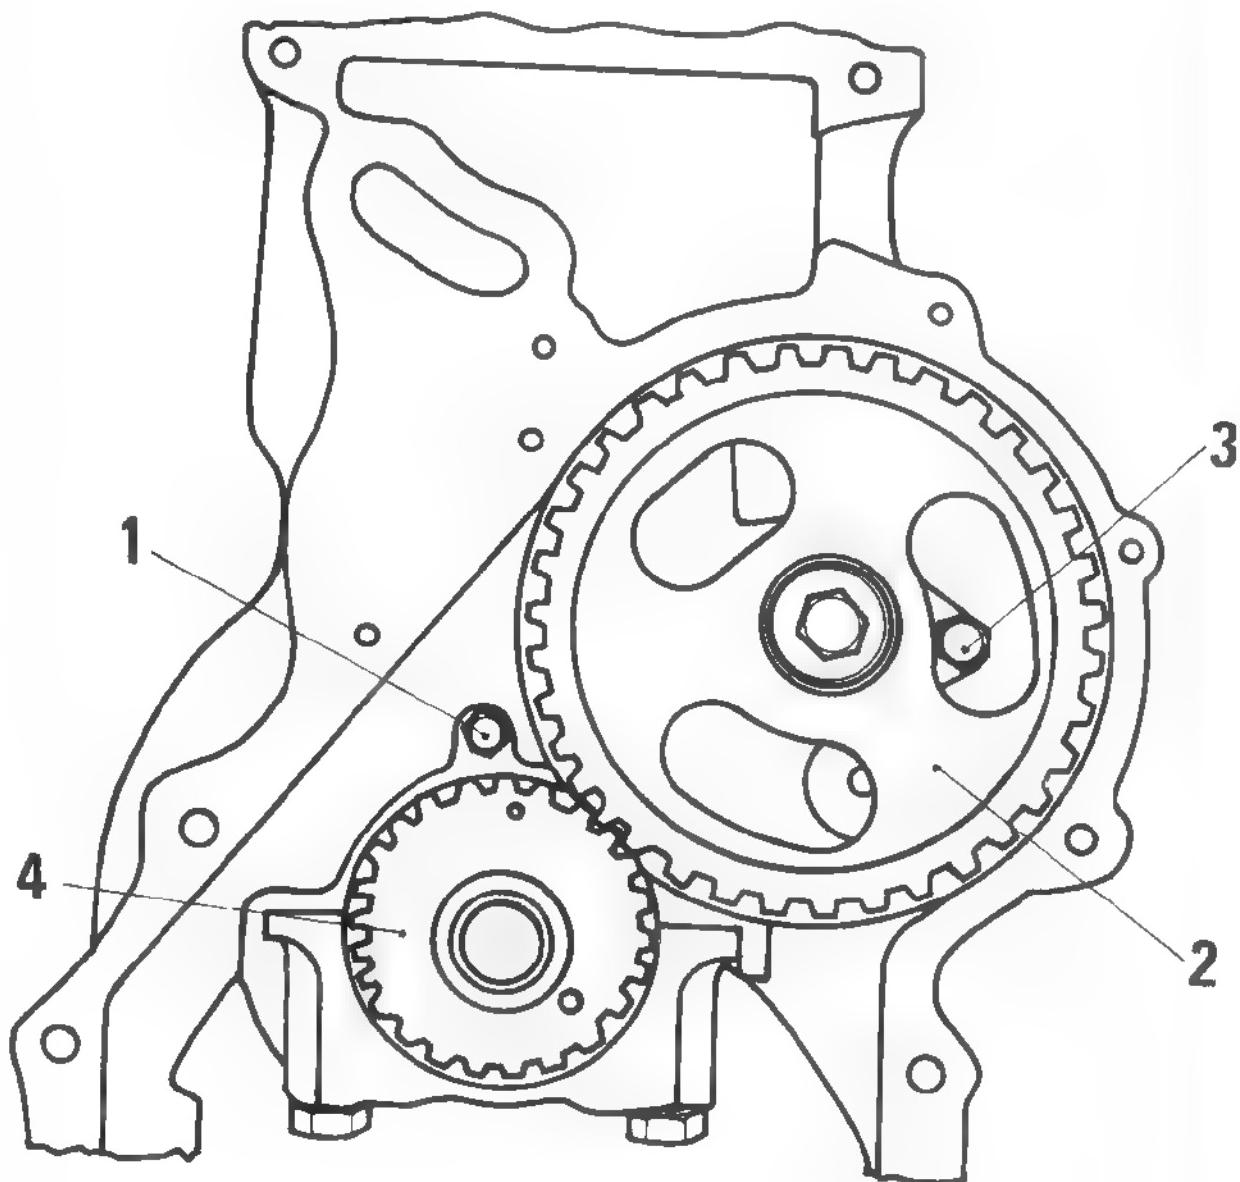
REFITTING THE CAMSHAFT DRIVE GEAR
